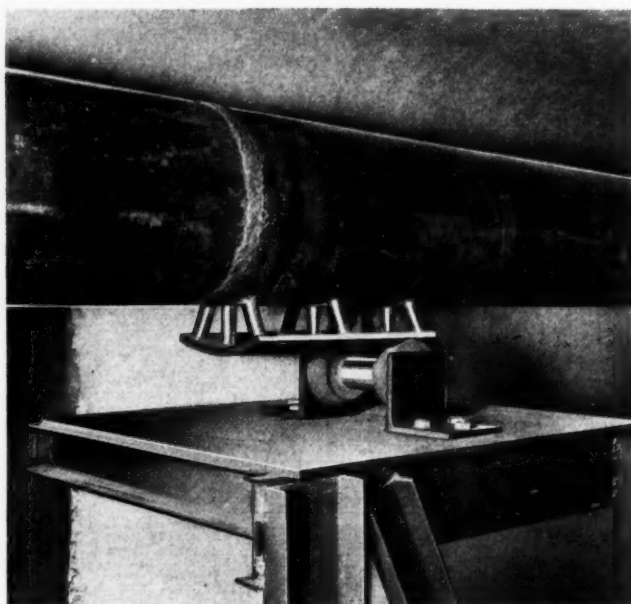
View of High-pressure Steam Pipe, Showing Welded Joint
